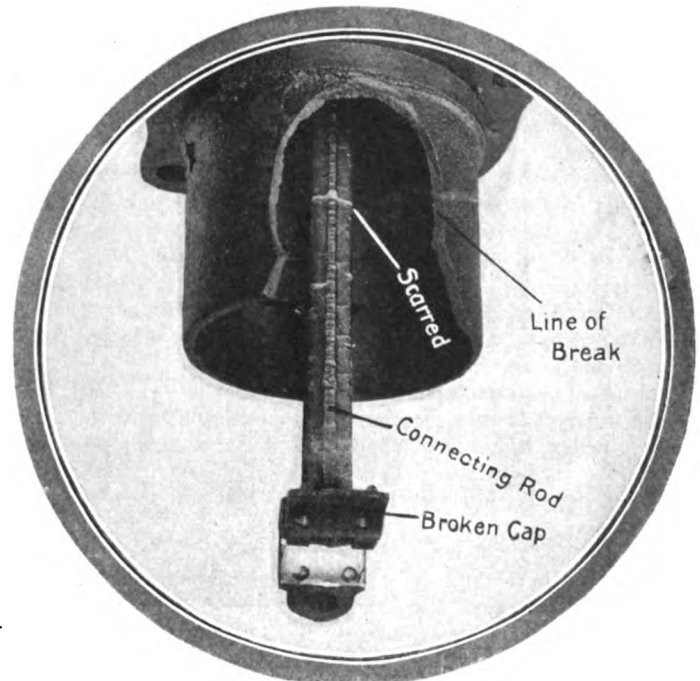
Illustrating a broken cylinder which was caused by the failure of one of the connecting rod bolts. The following revolution of the crankshaft drove the connecting rod through the cylinder
